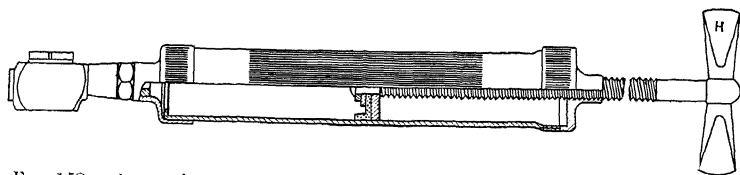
Screw-plunger gun equipped with double-duty button-head coupling.
